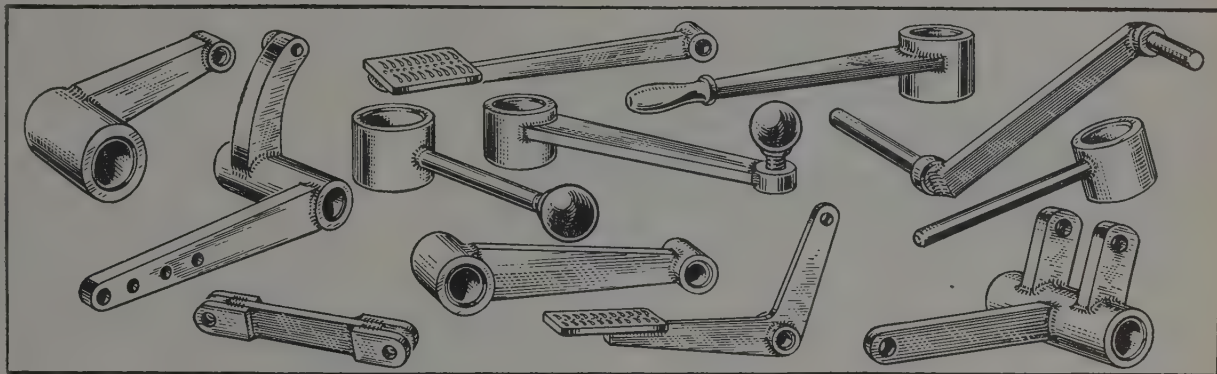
Typical machinery operating levers that are being weld-fabricated at lower cost with arc welding.
